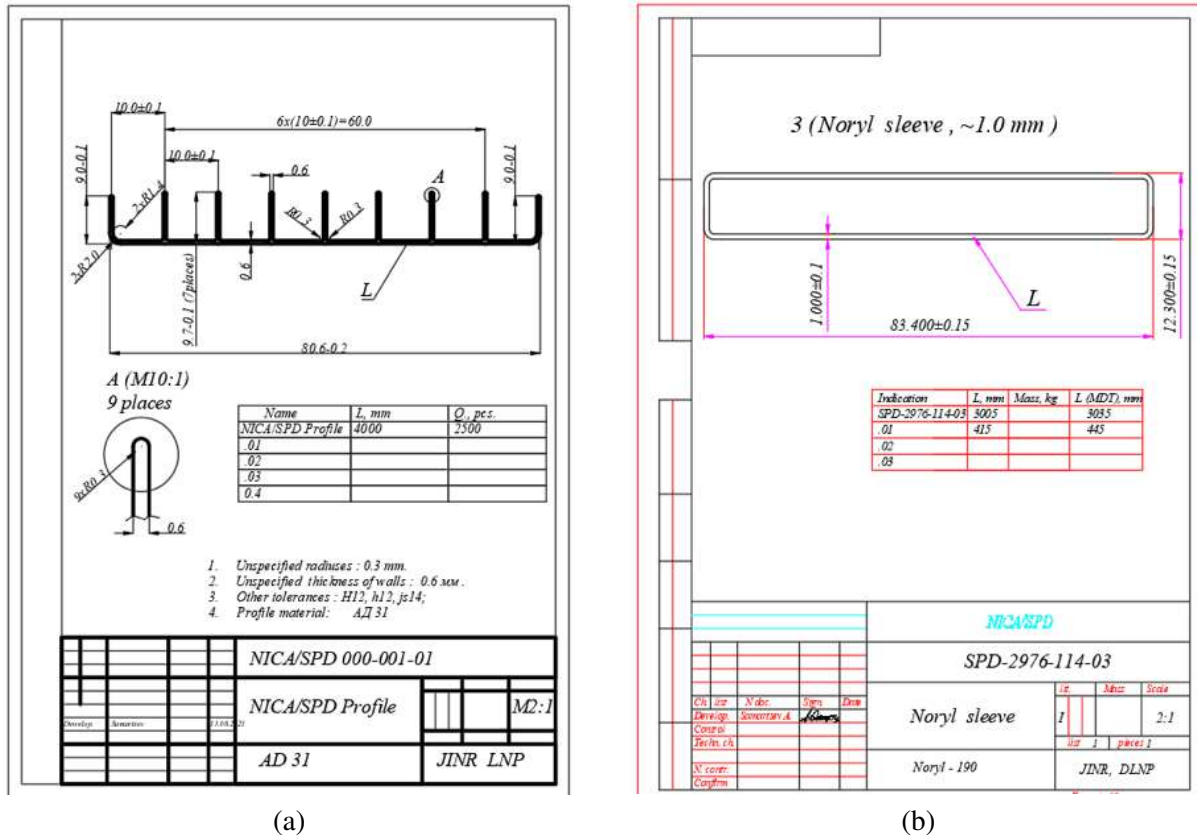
(a) Drawing of aluminum extruded profile manufactured by AGRISOVGAZ. (b) Drawing of plastic envelope for MDT detector.
